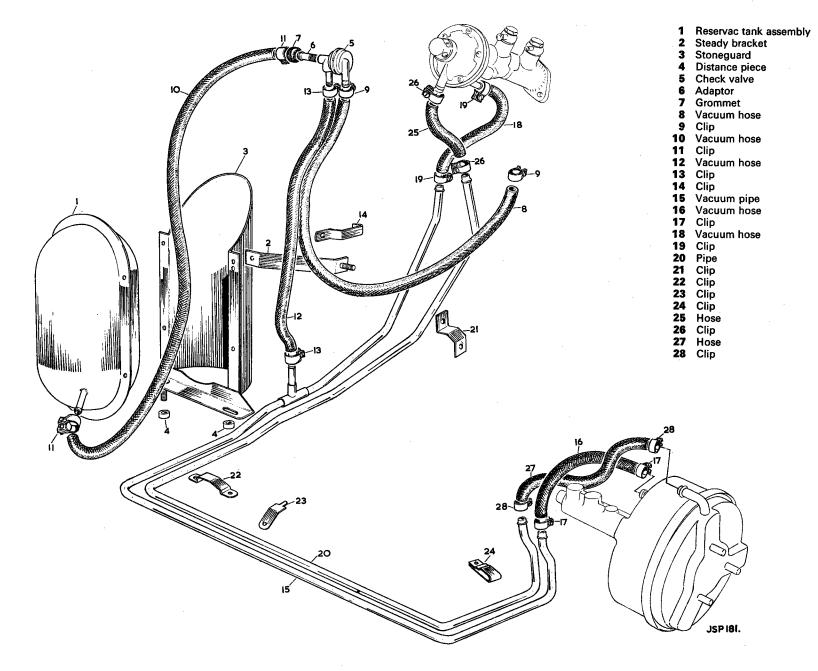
Exploded view of the vacuum reservoir and check valve
